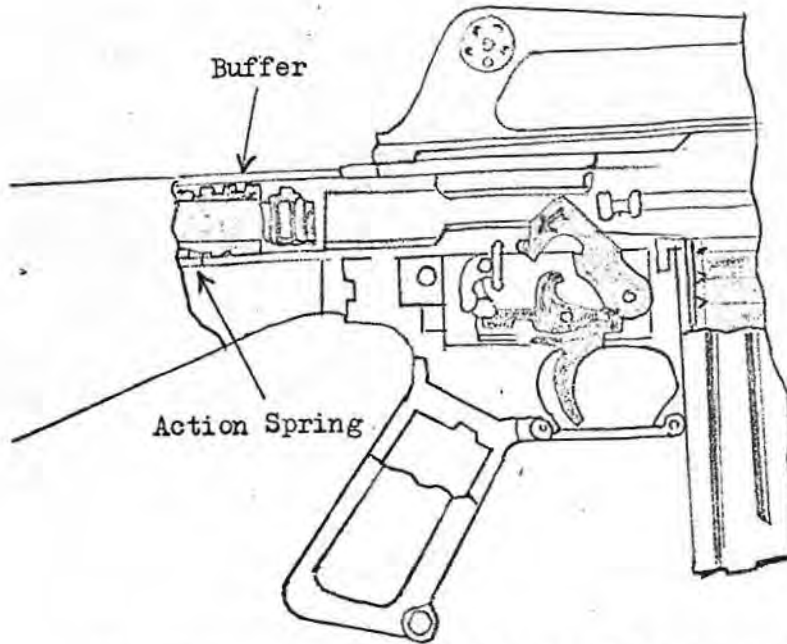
COCKING DURING REARWARD MOVEMENT OF BOLT CARRIER GROUP
